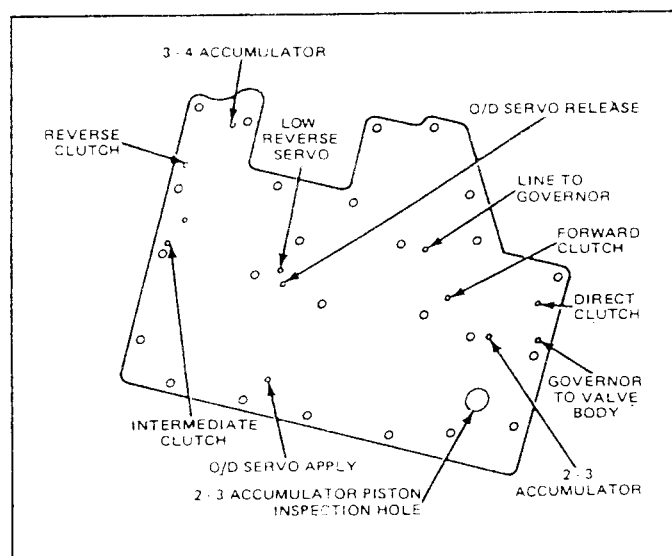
Air Pressure Check Plate—AOD Transmission Service Tool T82L-7006-A
